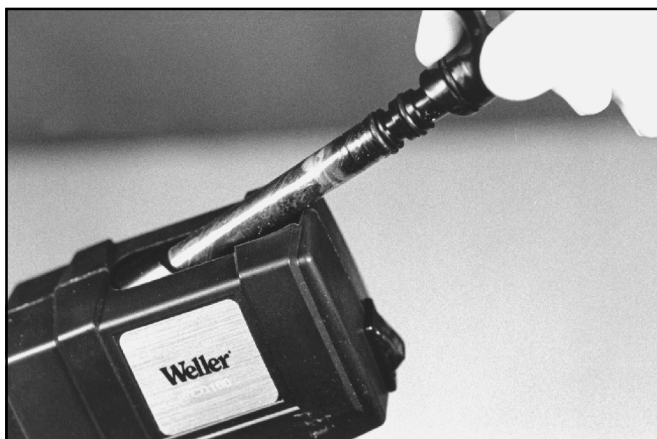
After desoldering 300 to 500 joints, the tube inside the Weller SCD100 must be replaced.
